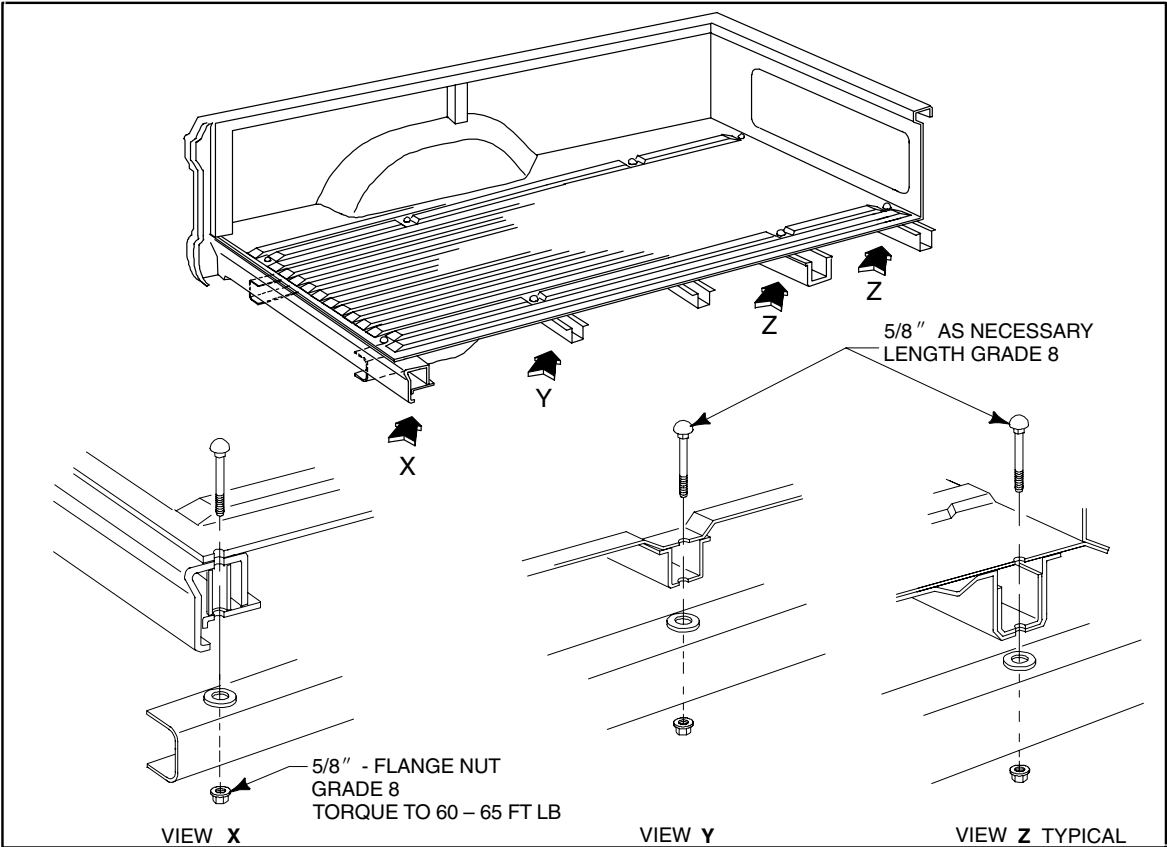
FIGURE C - SUPER DUTY F-SERIES SUB MOUNTING TECHNIQUE #3
